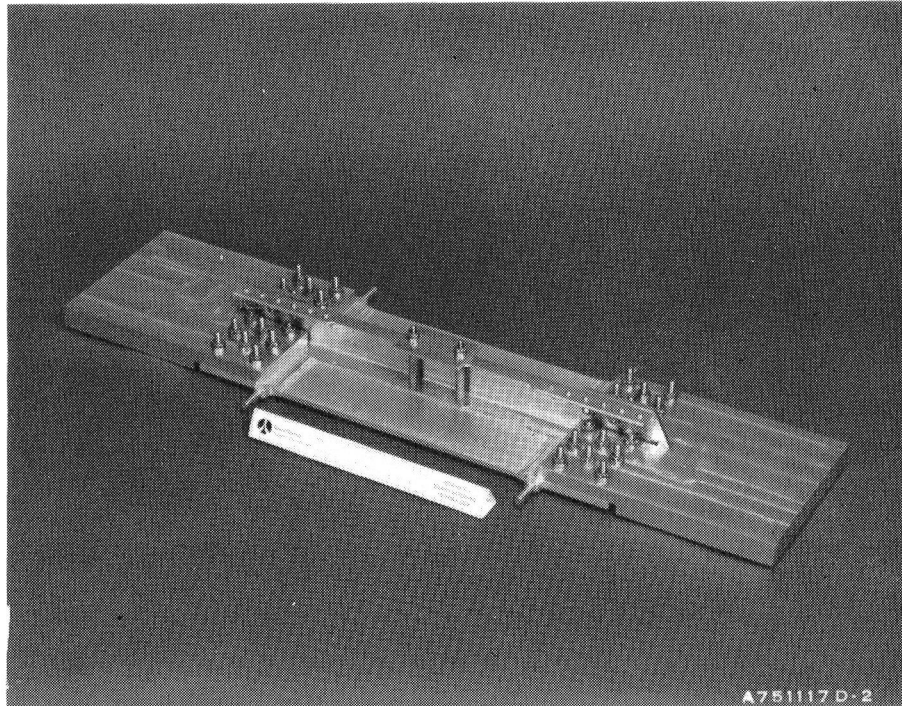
SIHS—Inboard Side of Completed Fatigue Test Specimen
